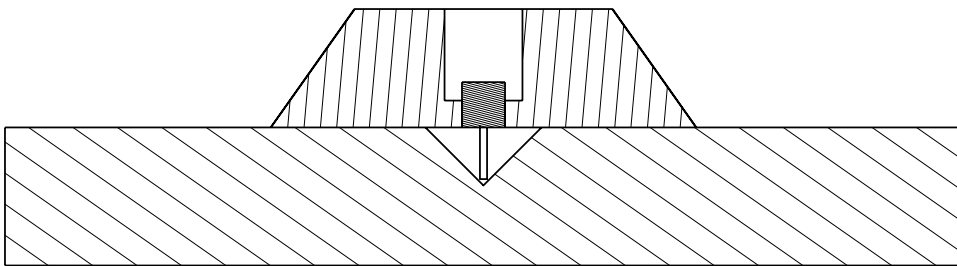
A cross-section of the target endpiece mounted to the fork alignment plate, showing the two bottom edges of the fork's tines resting against the two sides of the plate's groove. The tines' thickness is exaggerated in this drawing.
